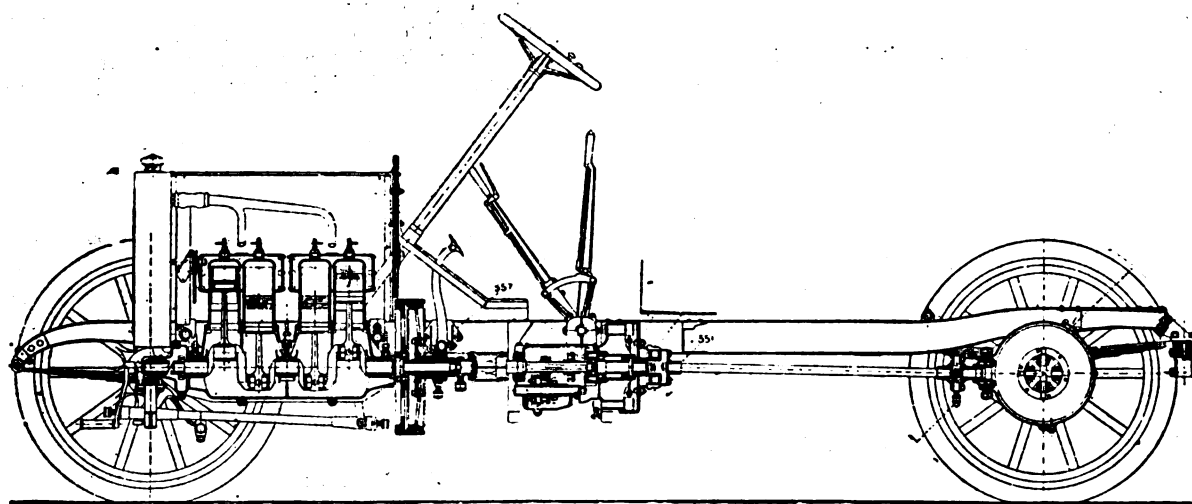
Elevation of Chassis of F.N. 14-16-h.p. Car.
